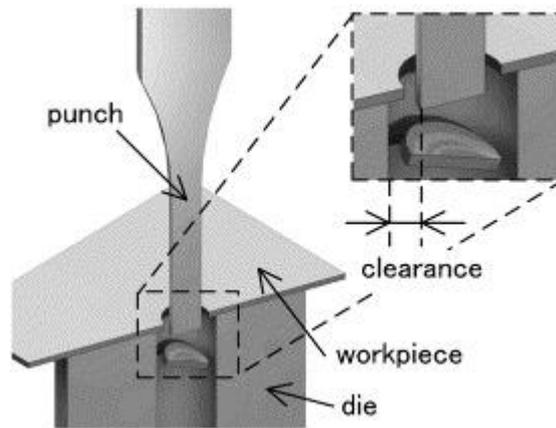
Cutting clearance of cylindrical punch and die (Kibe, et al., 2007).
